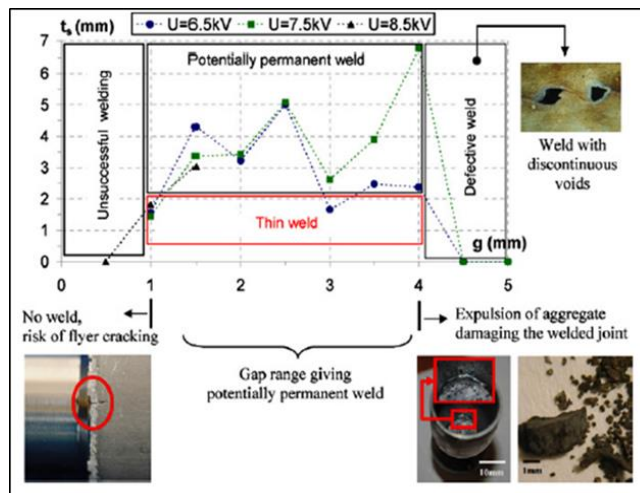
Graphical abstract showing both welding conditions and found welded joint kinds [10]
